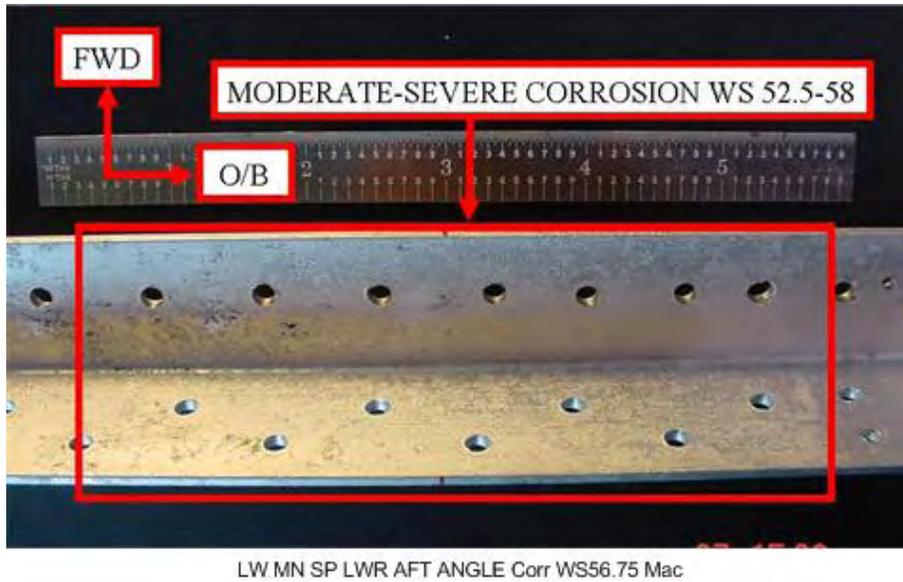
Macroscopic View of Moderate-Severe Corrosion on the Left Wing Main Spar Lower Aft Angle WS 52.5 Through WS 58
